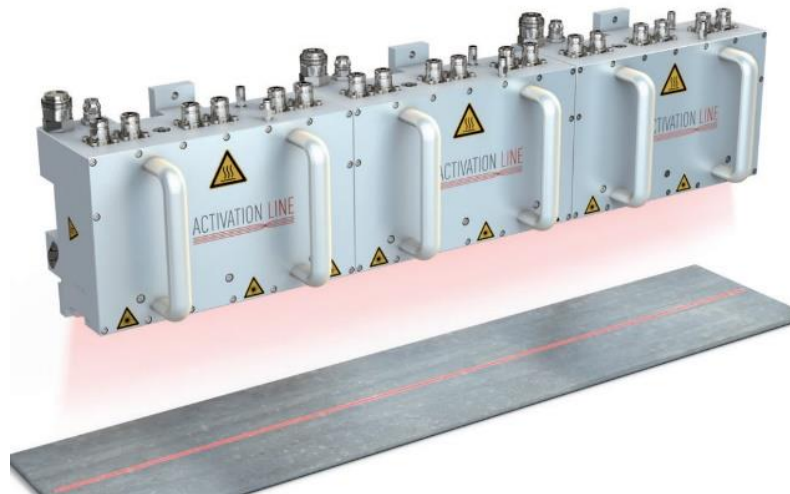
Picture of the line laser system with 3x laser modules (laser processing head shown only)
